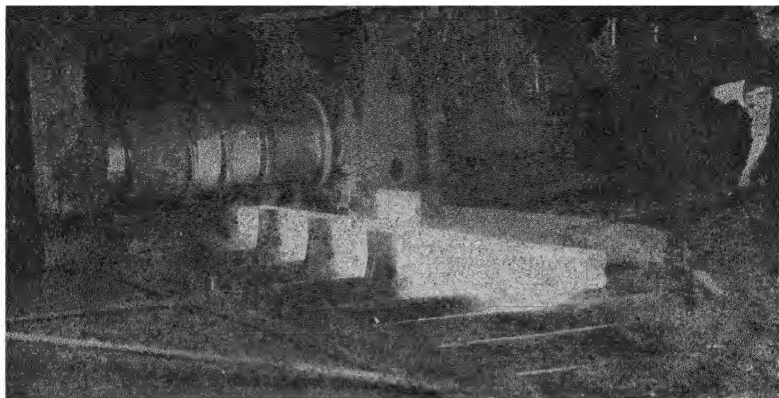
To save the time and labor of cutting materials, men have invented power rolling and stamping machines to shape materials. Here white-hot steel is being squeezed into the desired shape. Even cold metals can be stamped into almost any shape. (Fox photos)
